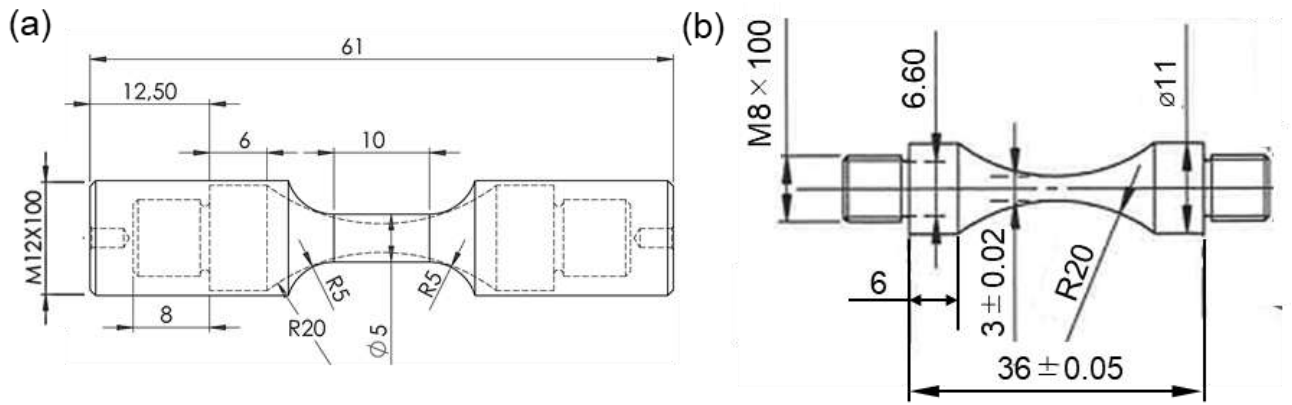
Geometries of cylindrical gauge specimen for tensile pre-deformation (a) and hourglass-shaped specimen for VHCF tests (b). Dotted lines in (a) are showing geometry of VHCF specimen in (b).
